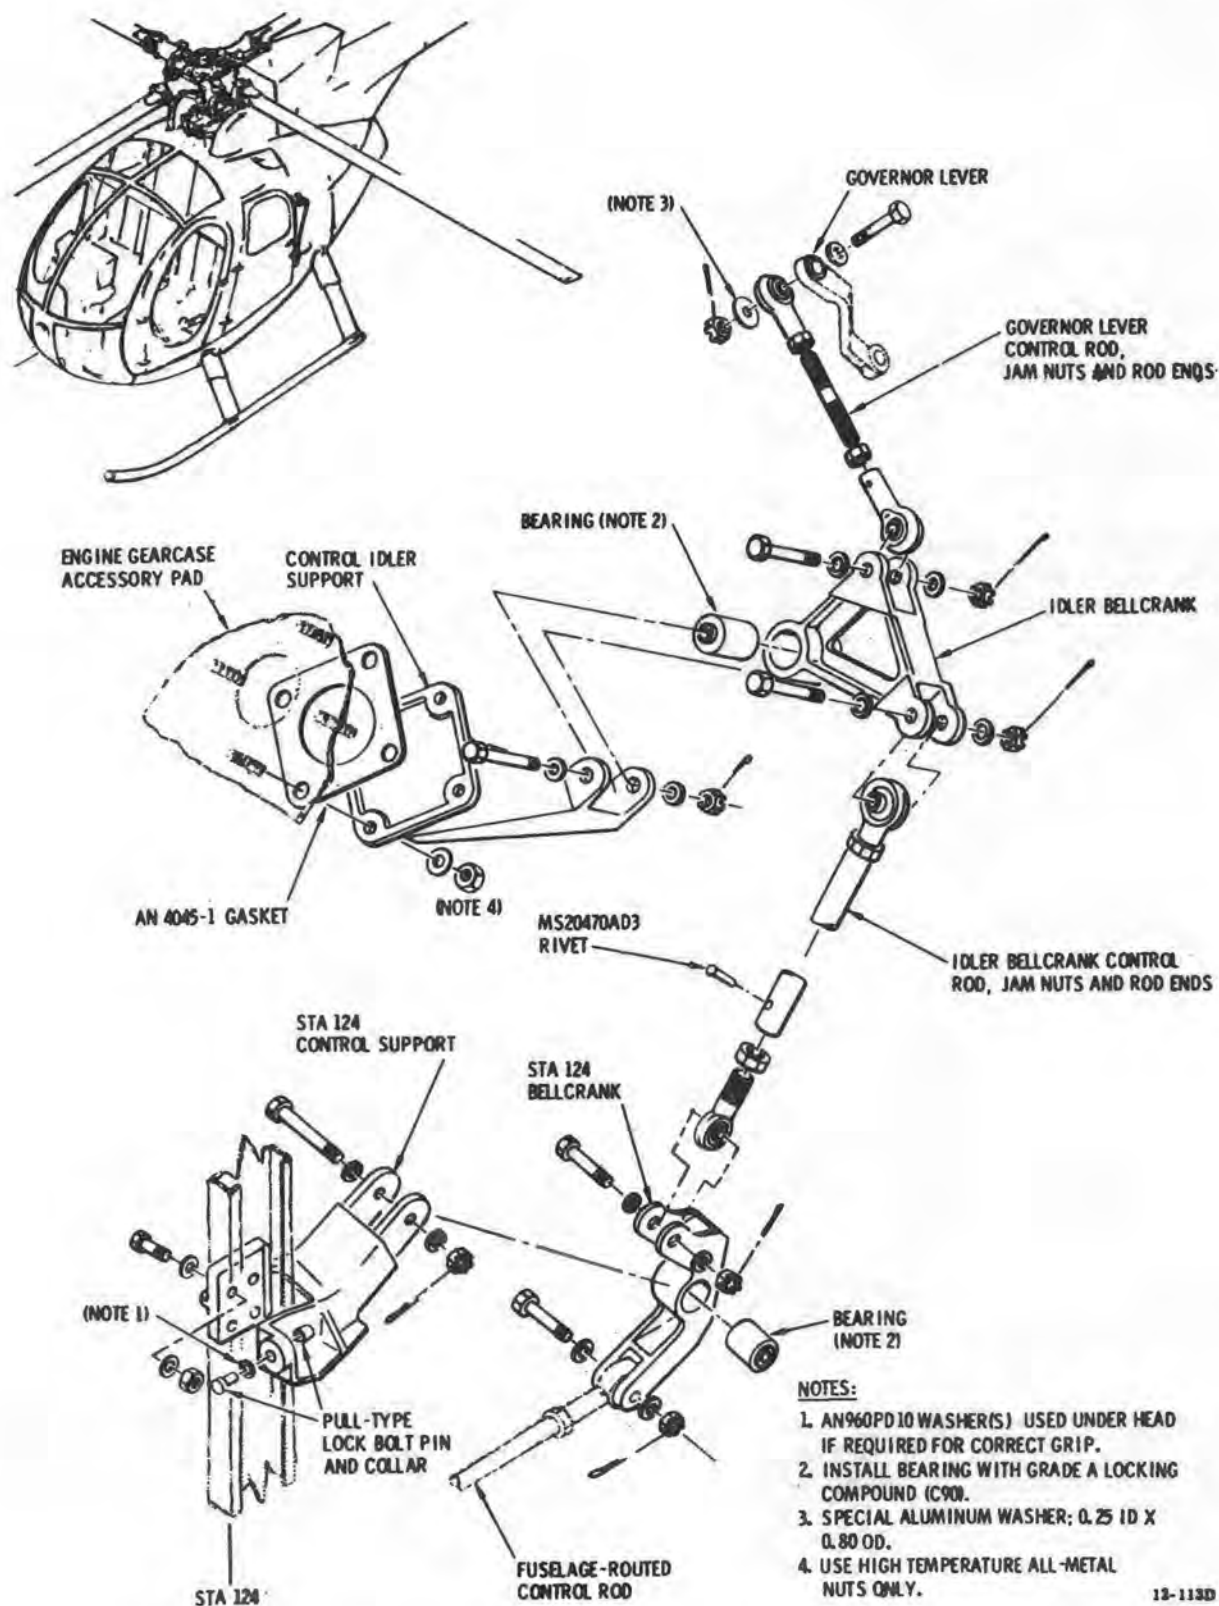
Governor Control Linkage (Engine Compartment) Disassembly.
